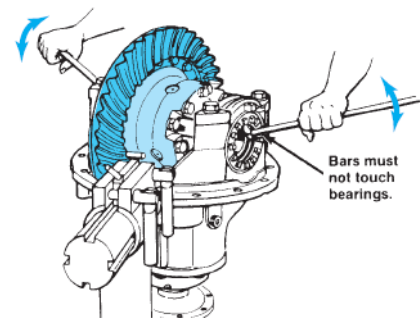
Ring gear runout should be less than 0.10 mm as measured by a dial indicator
